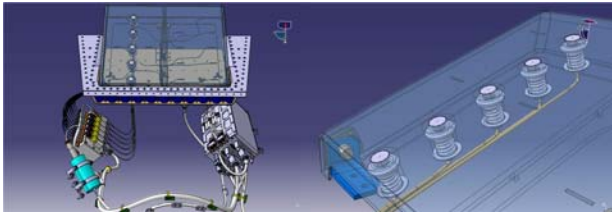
Instrumentation layout of the EXPERT flap assembly.
